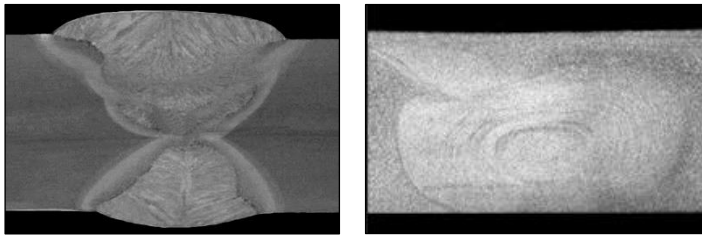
An arc welded butt joint (left) and a FSW butt joint (right) showing FSW joints contain significantly reduced macroscopic stress concentrations.
